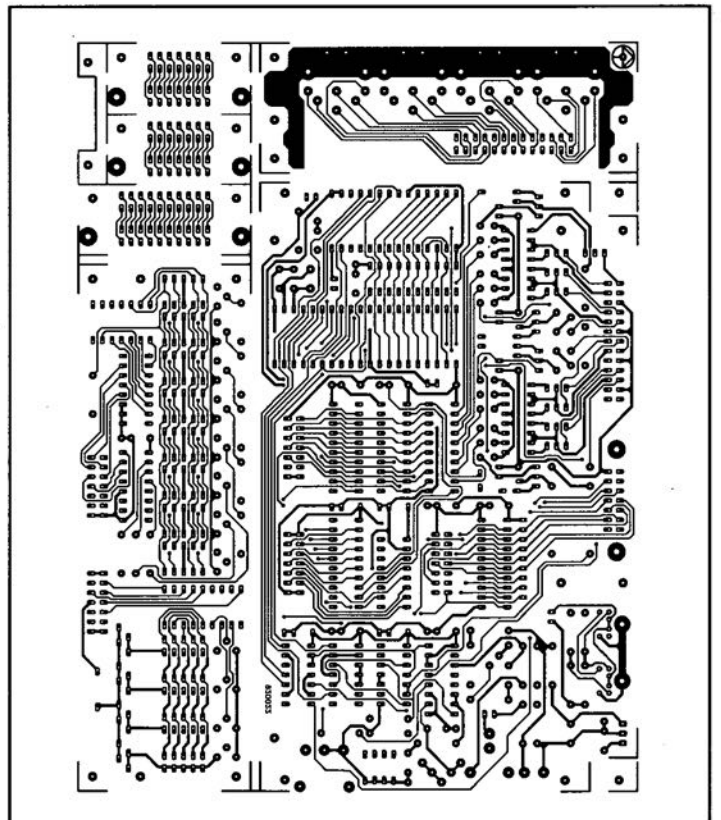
Solder side track layout (mirror image; reduced to 50%).
